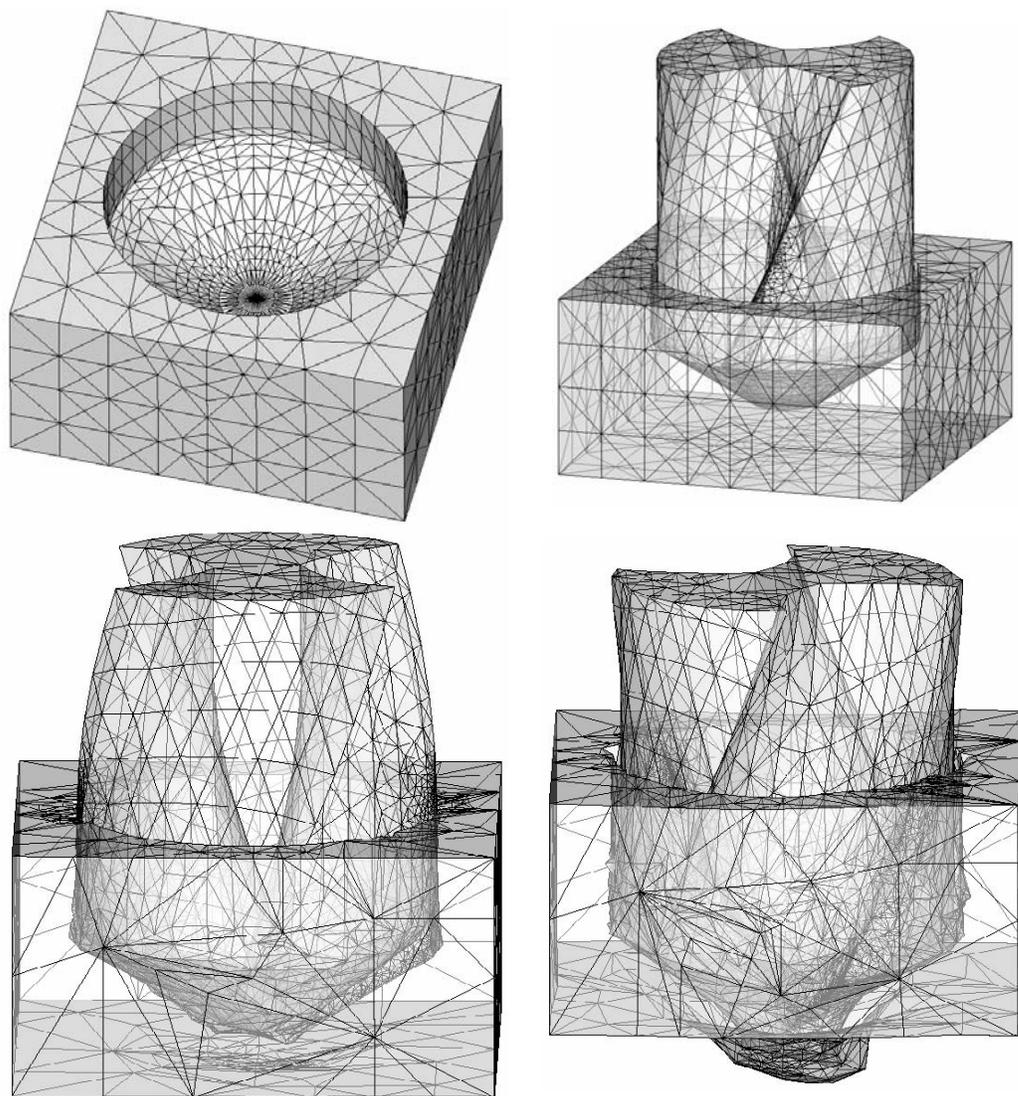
Different stages of drilling with pre-drilled holes are shown. (a) The initial pre-drilled hole in the workpiece; (b) the drill and workpiece combined (translucent mesh); (c) drill and workpiece after several rotations of the drill; (d) and drill break out on the bottom side of the workpiece.
